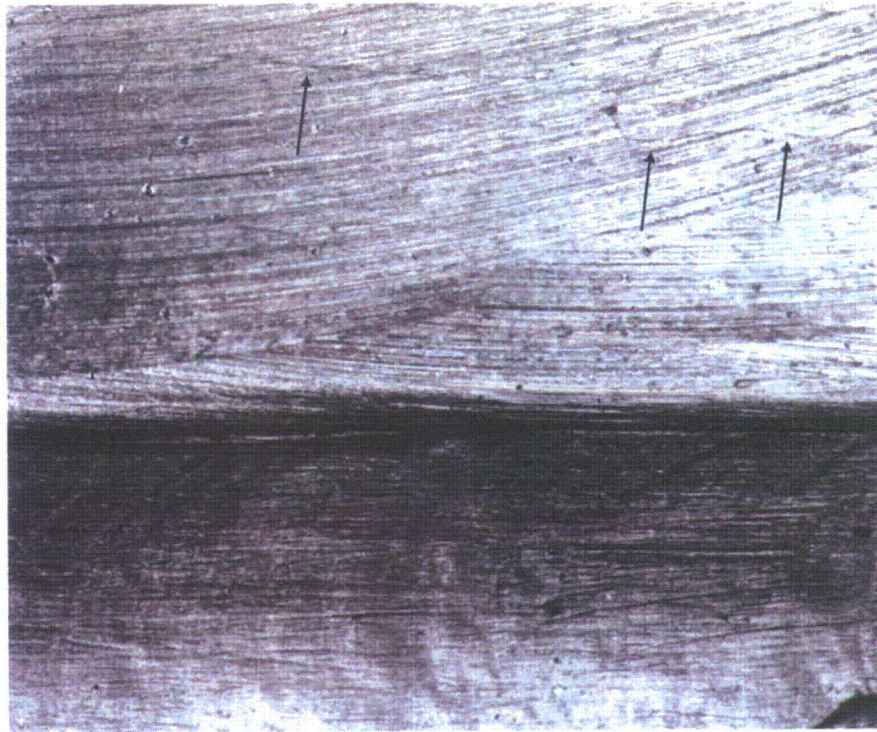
Narrow Crack Ranging 10–25 μm (0.0004–0.001 in.) Wide on a Machined Surface. The crack is easy to see when it cuts across machining marks and is difficult to see when it follows the marks.
